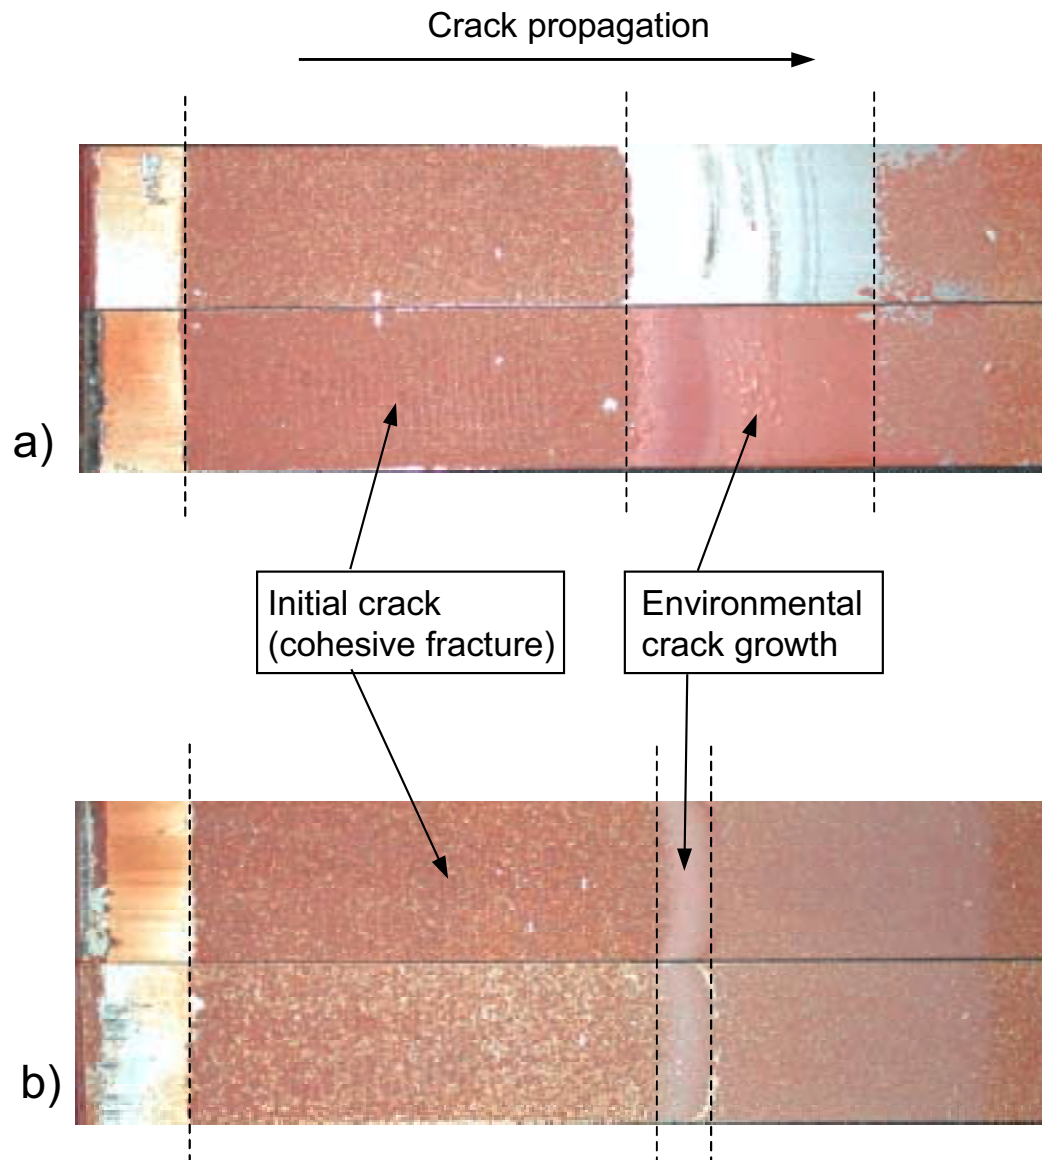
Fracture surfaces of AA6060 wedge test specimens. a) Ti-Zr treated at pH 4.0, showing interfacial failure during environmental exposure. b) Chromated specimen exhibiting slow, cohesive crack growth under similar conditions.
